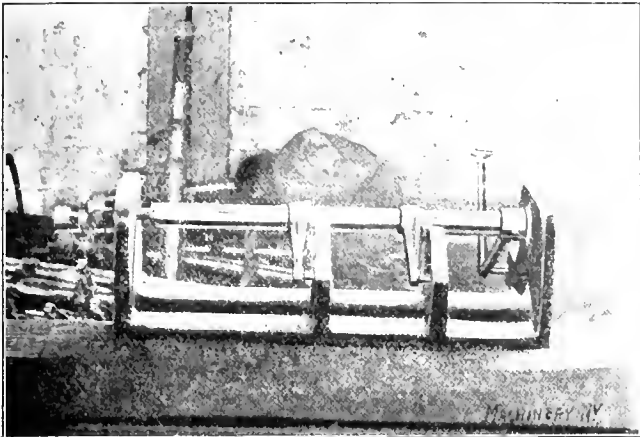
Jig in which Foot-lever Pin-holes are drilled
